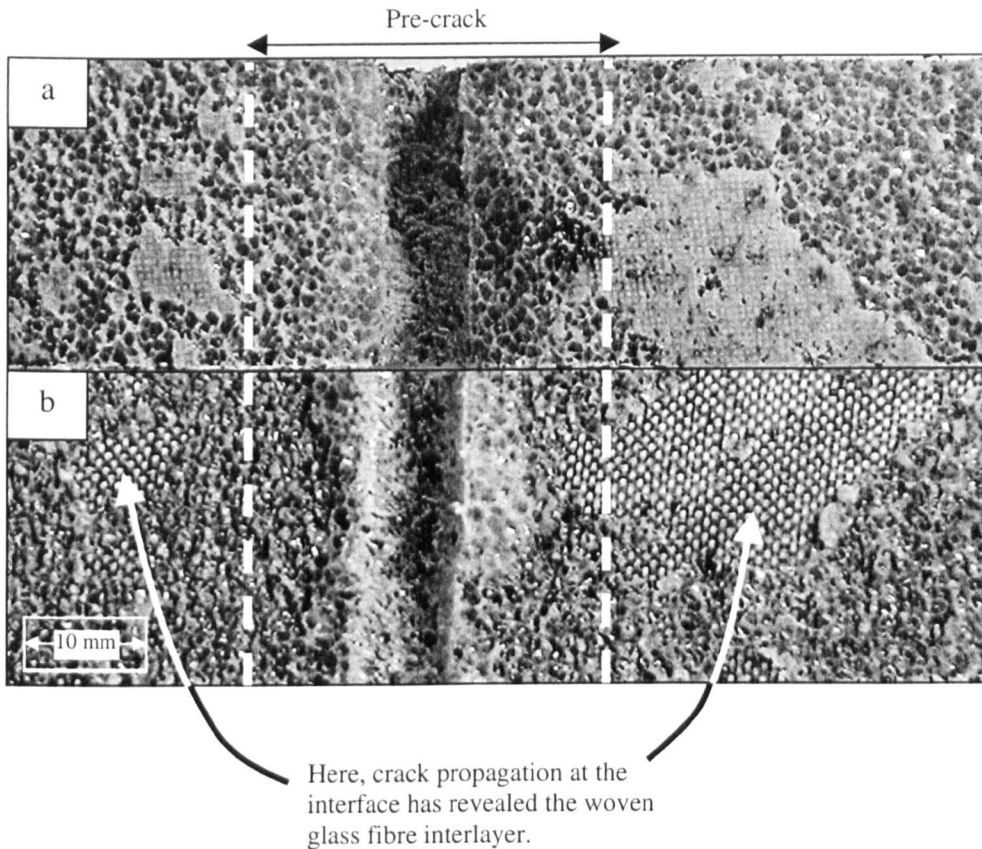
Fracture surfaces following a CNFS test on Structure N, (a) the upper surface of the core material showing the imprint of the woven GFRP interlayer where crack propagation occurred at the interface, (b) the face-sheet fracture surface, containing patches of core material.
